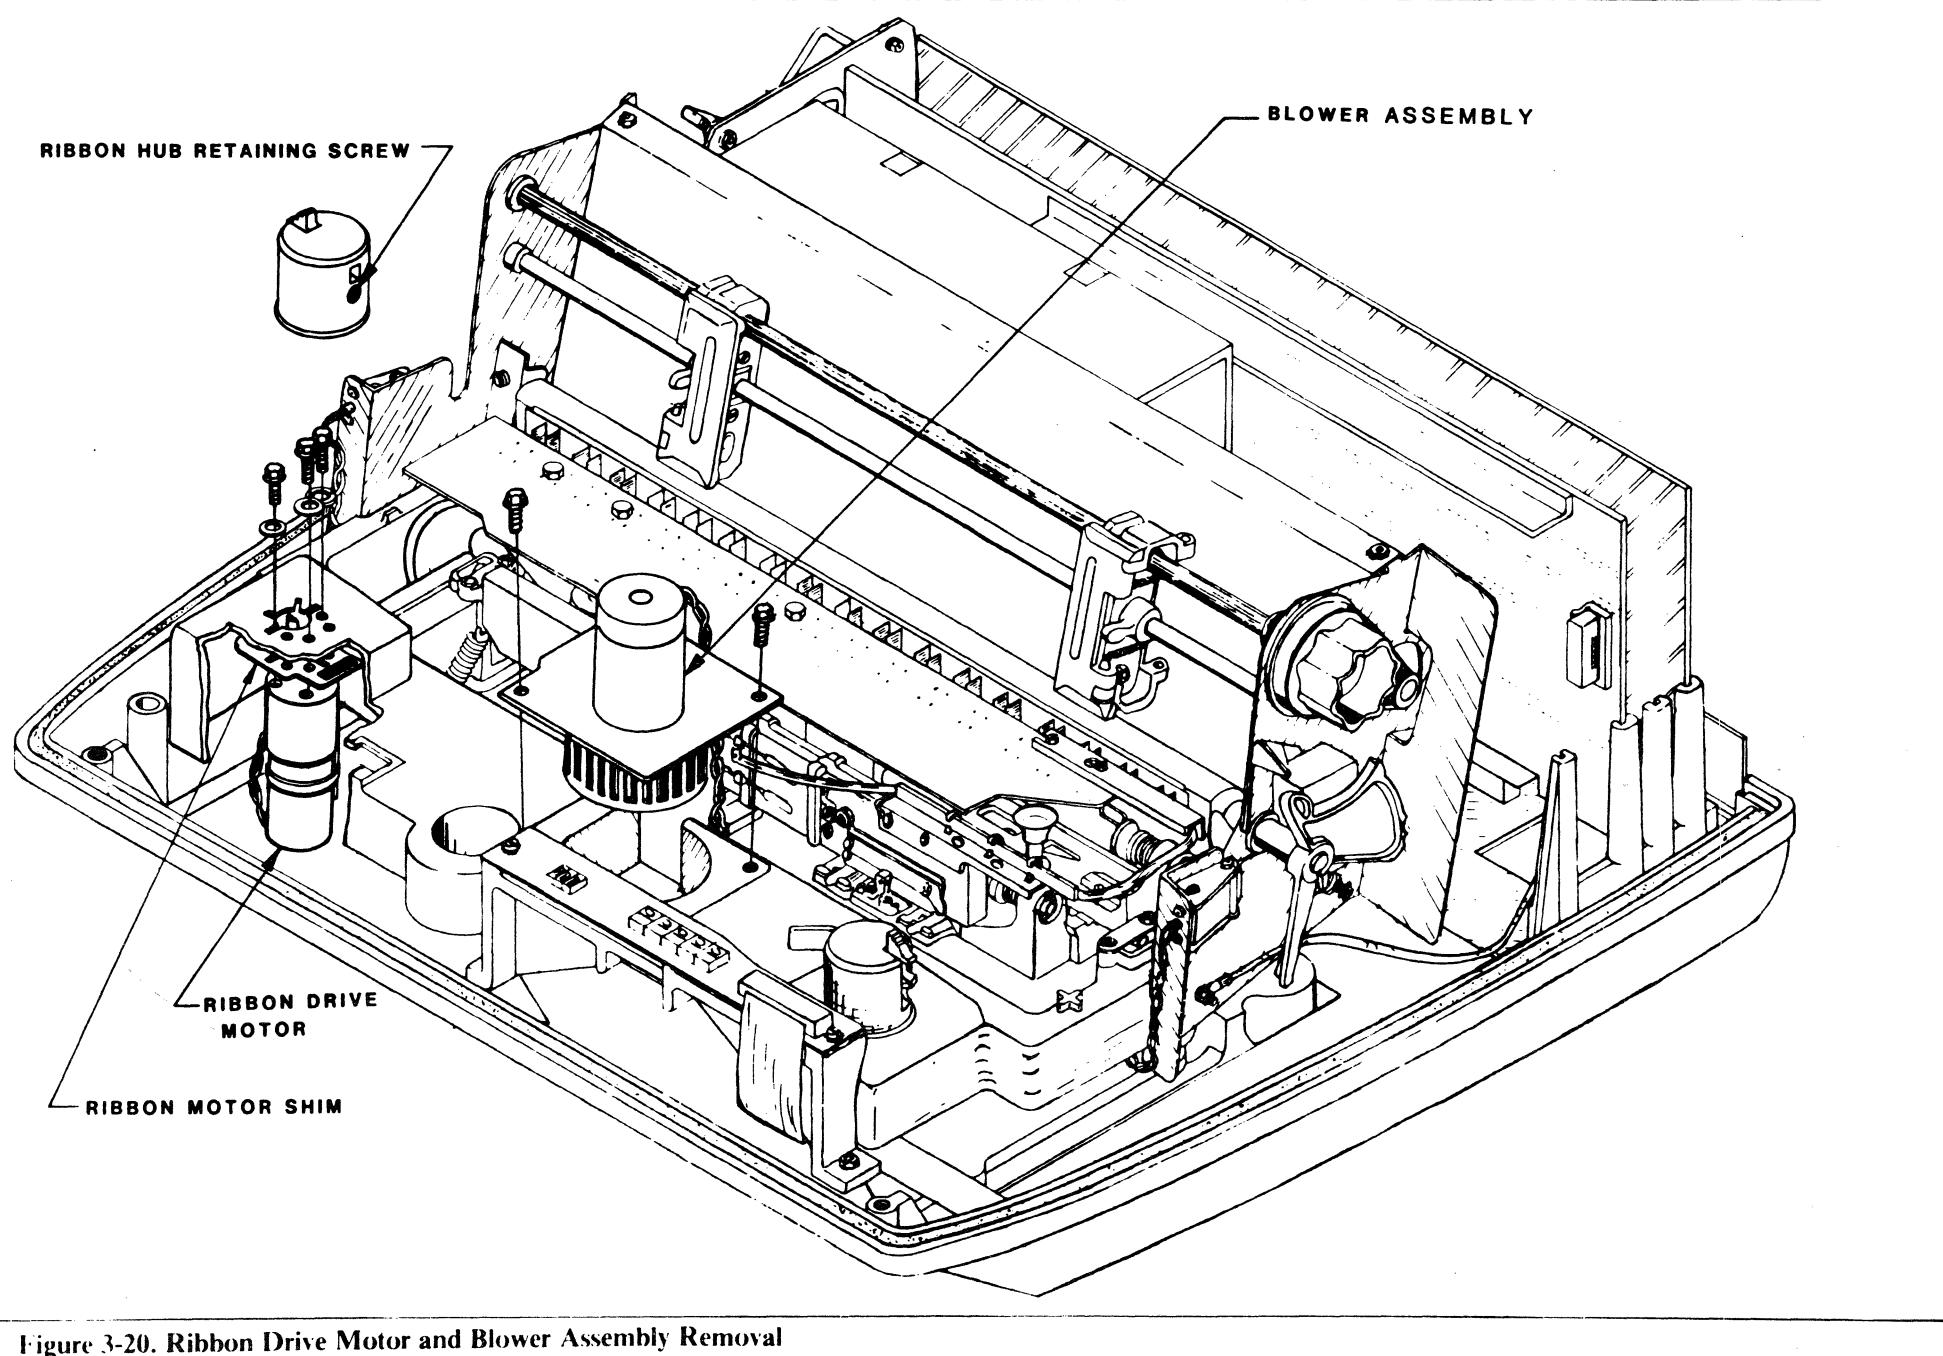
Ribbon Drive Motor and Blower Assembly Removal
